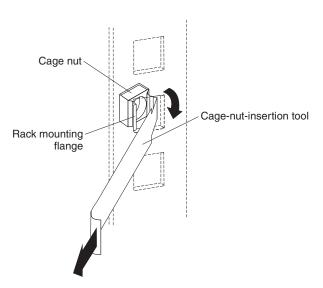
Installing cage nuts with the cage-nut-insertion tool
